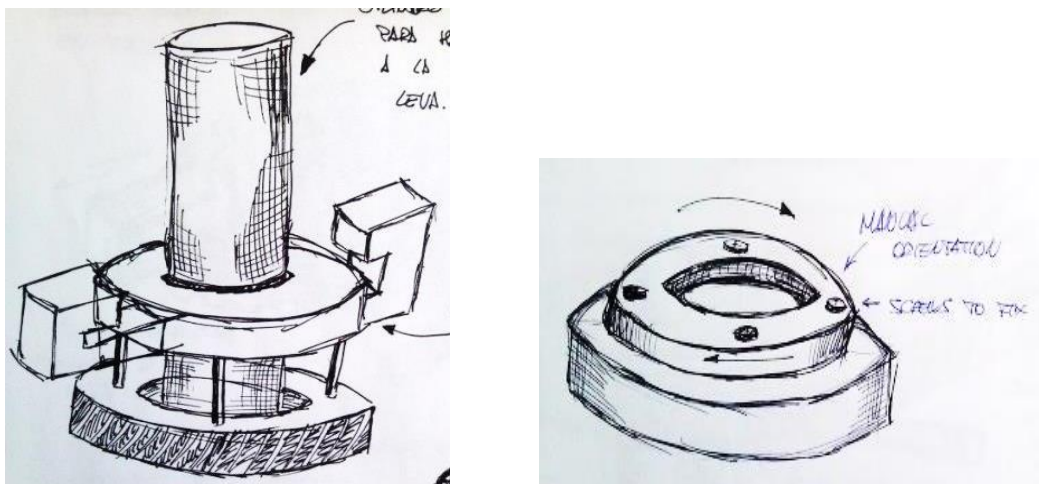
More examples of the brainstorming process for a clamping device which can fix and orientate the work-pieces. Left: Fixing mechanism. Right: An idea to orientate the ring on its correct position
